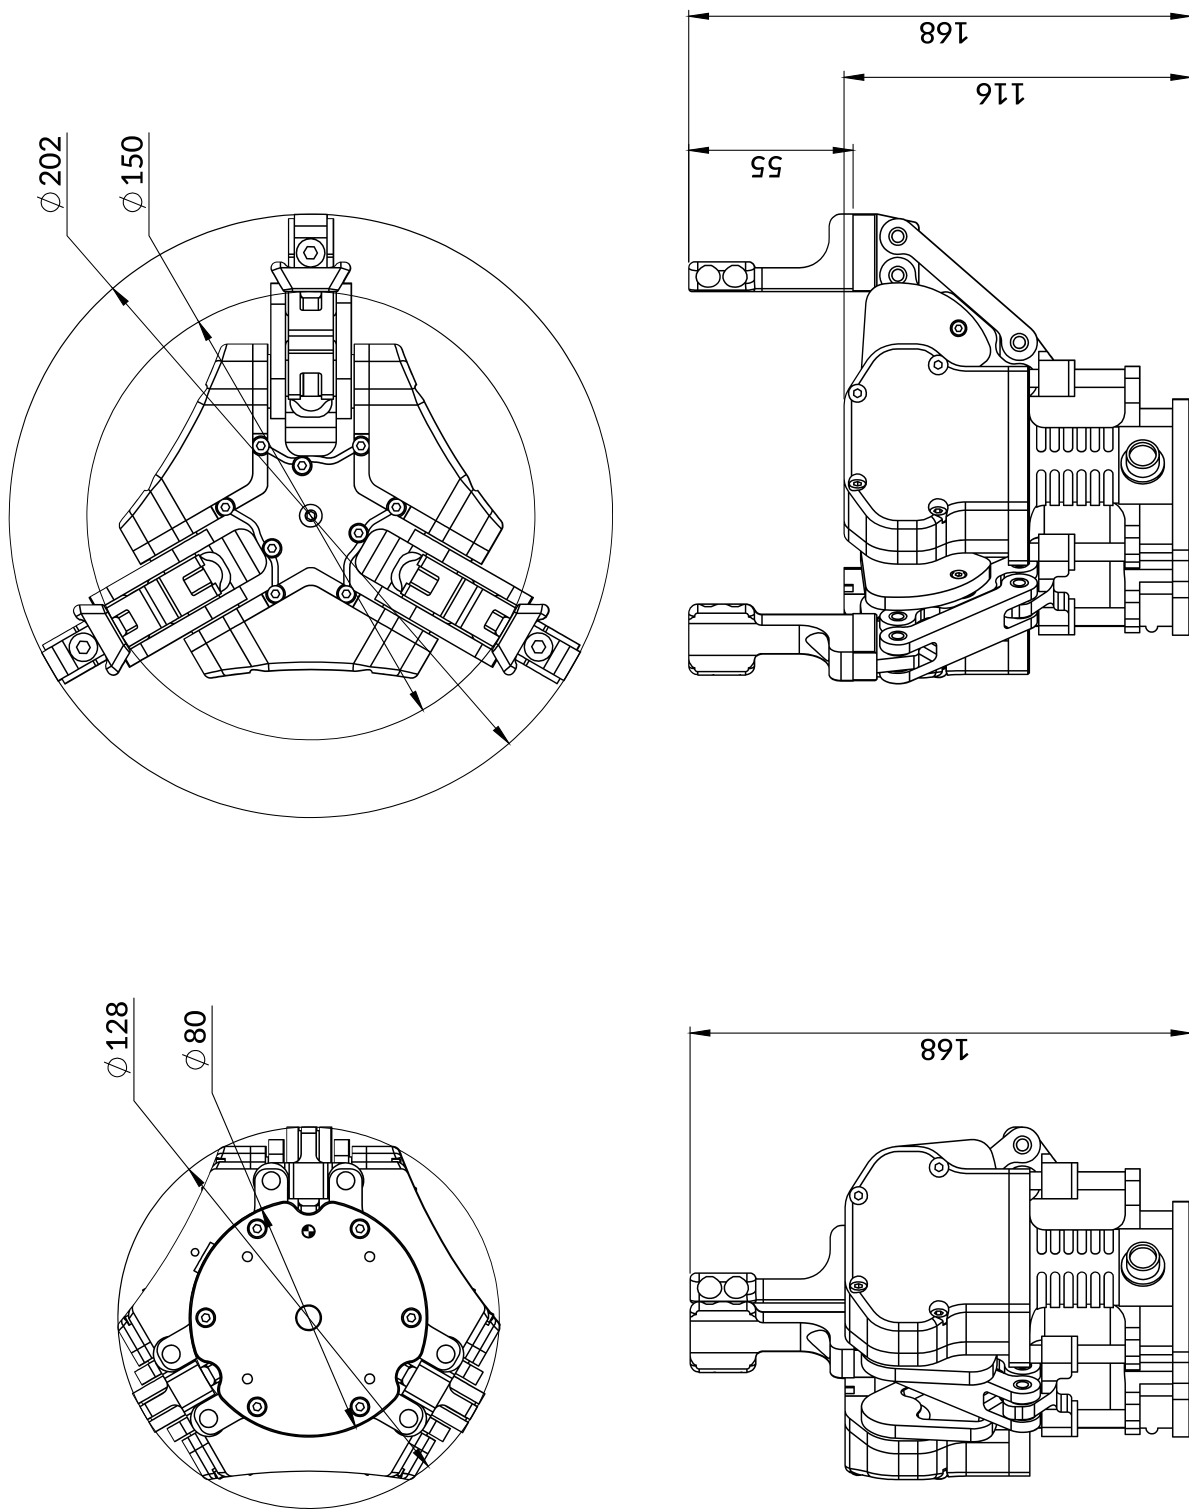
SusGrip 3F Mechanical Dimensions (All, Rotated)
